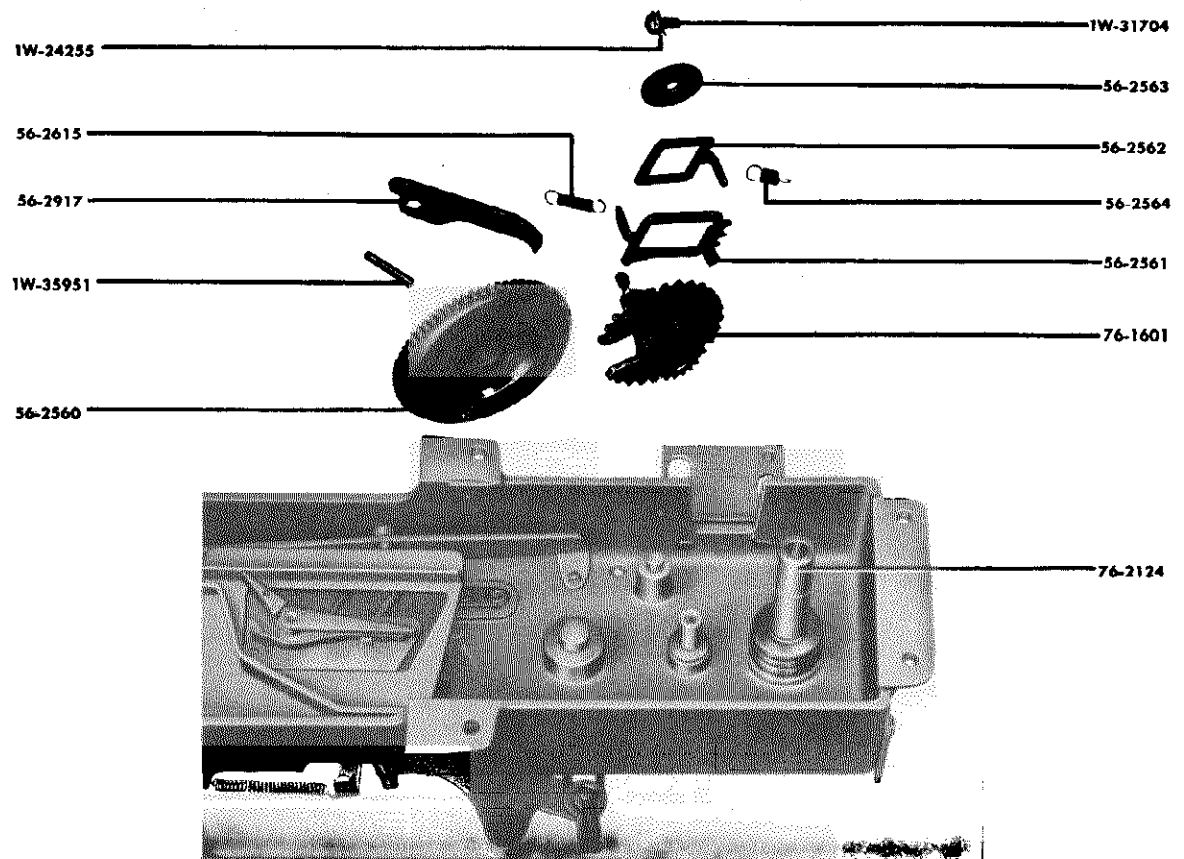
PARTS OF MAIN-GEAR AND INTERMEDIATE-GEAR ASSEMBLIES, UNDERSIDE VIEW.
